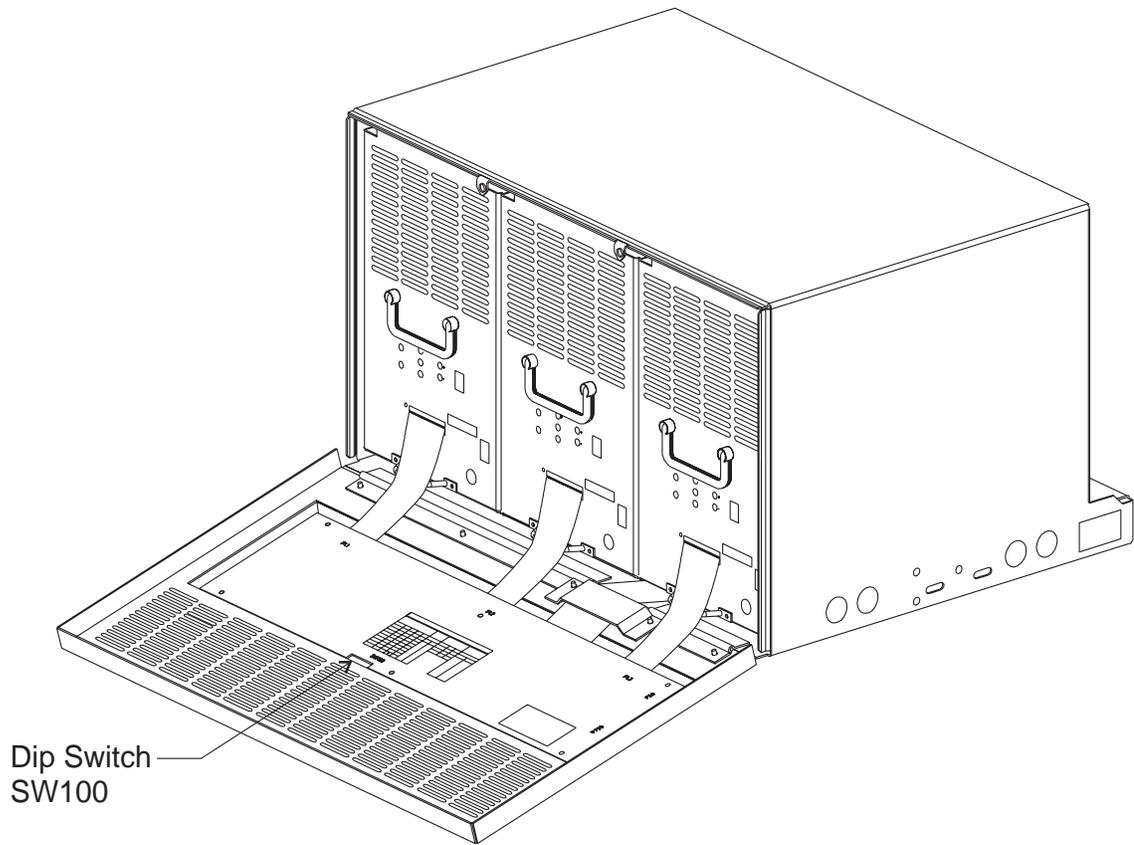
PMAs Installed in a Rectifier Housing Assembly
